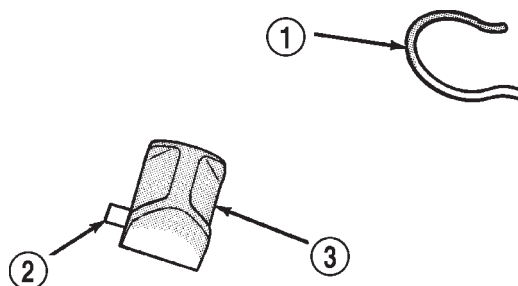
Reaction Plug Locating Pin And Snap-Ring
